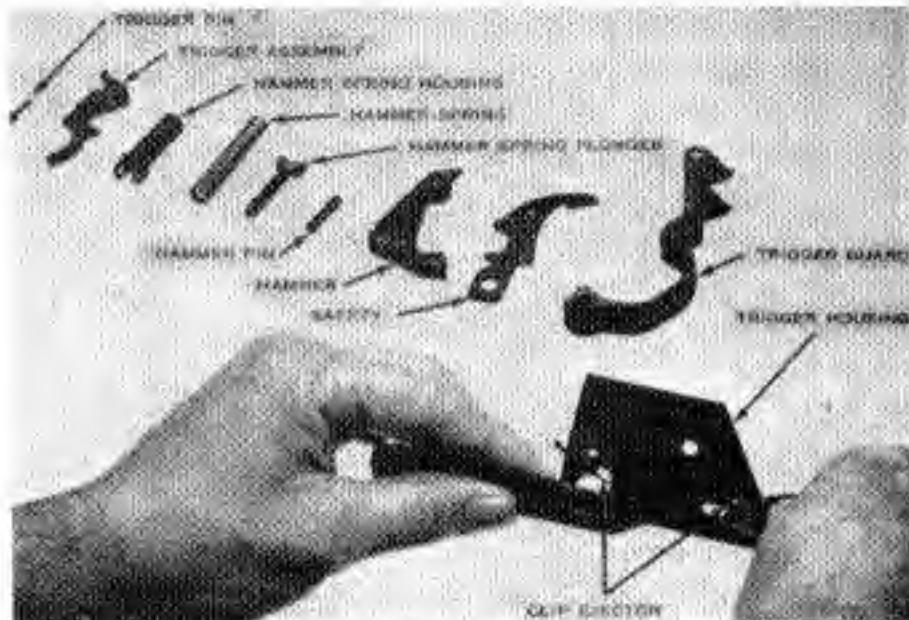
Removing the clip ejector, other parts shown in order of disassembly.
